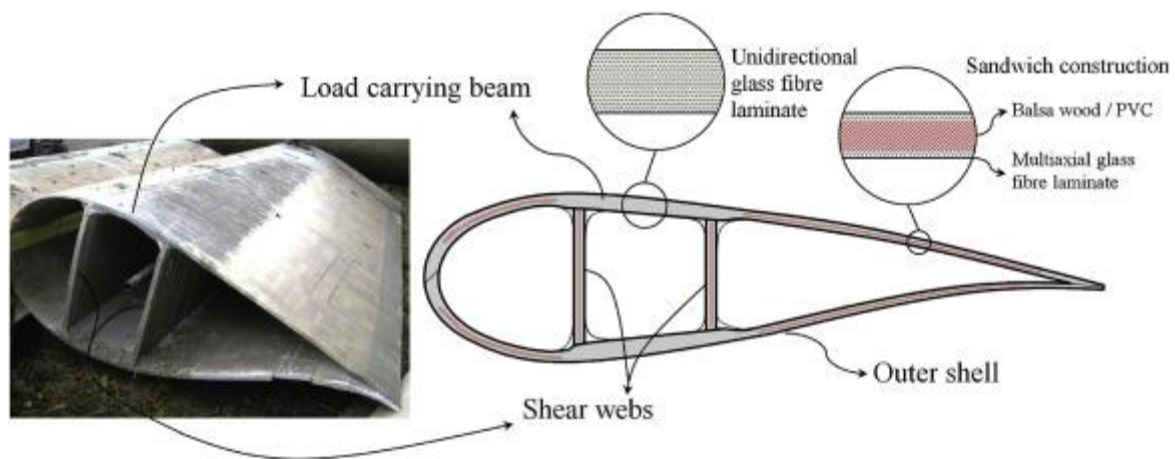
Structural design of wind turbine blade, demonstrating shear web layouts and sandwich construction, source: (J. Nagle et al., 2020)
